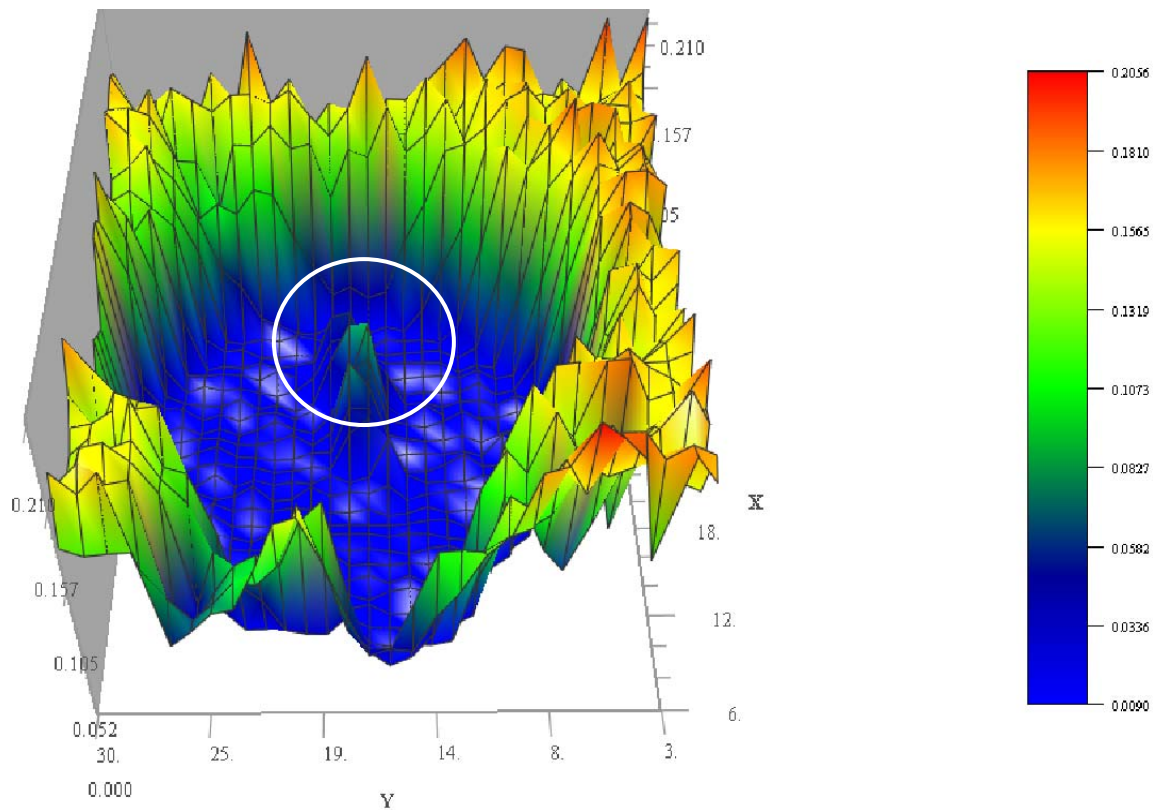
Close-up view of the nugget zone in the C-Scan image obtained for the third weld in Figure 14. The white circle indicates reflections coming from the middle of the weld nugget, suggesting the existence of a defect inside the weld.
